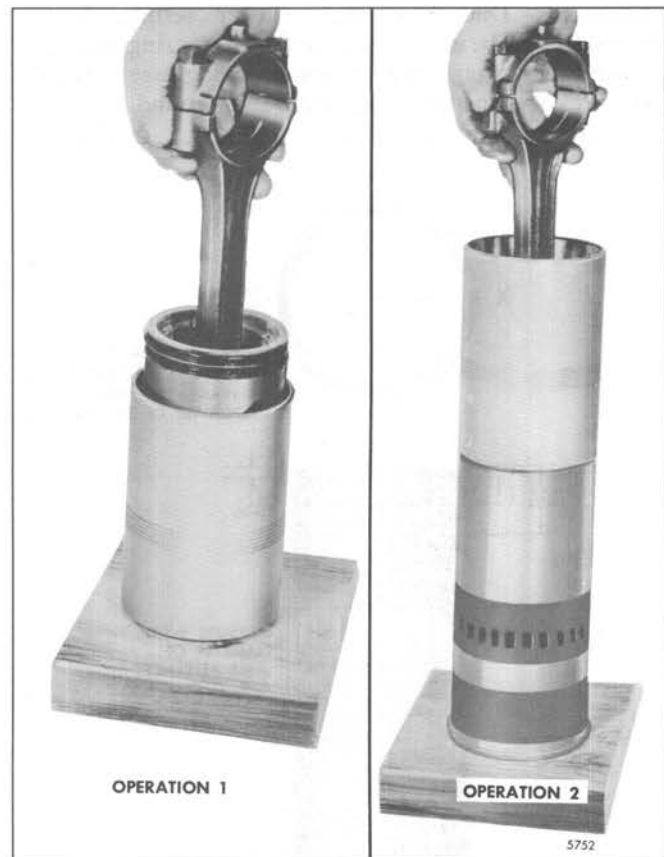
Installing Piston and Connecting Rod Assembly in Ring Compressor and Cylinder Liner
